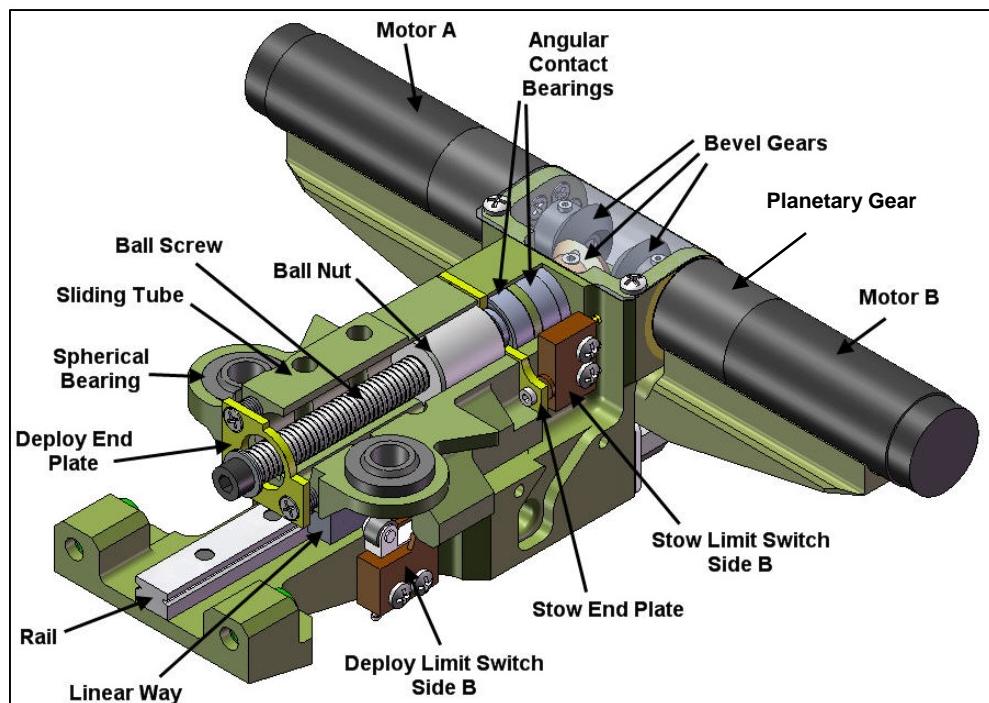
Motor Bracket Assembly shown in the stowed state
